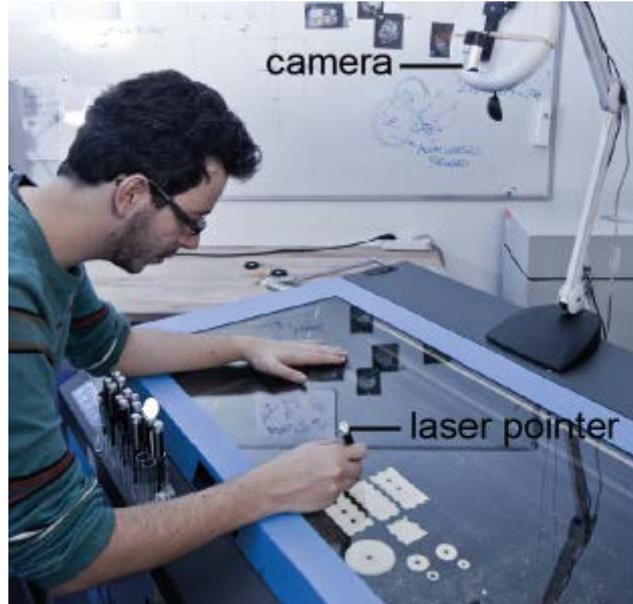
Constructable users interact by drafting directly on the workpiece with hand-held lasers. (Source: "Interactive Lasercutting" [5], 2012)
